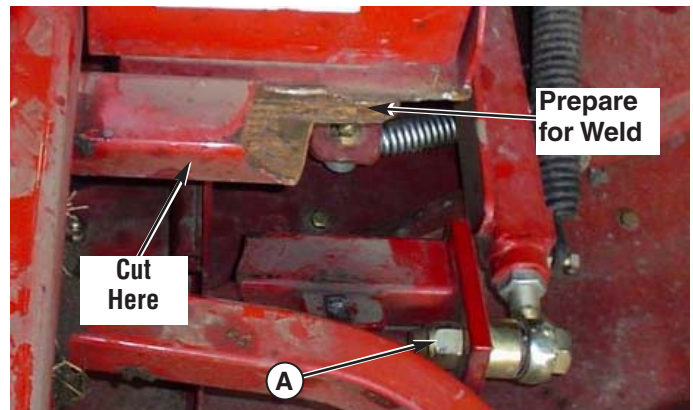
Remove 3/4" Hardware and Cut Cross Member
